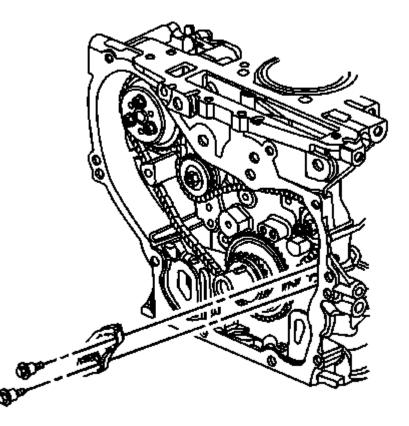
Upper Balance Shaft Drive Chain Guide Courtesy of GENERAL MOTORS CORP.
